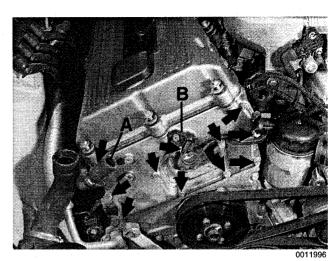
Upper timing chain cover bolts (arrows). Remove secondary air injection check valve from hose (A) on M44 engine. Remove cylinder identification sensor from chain cover (B).
